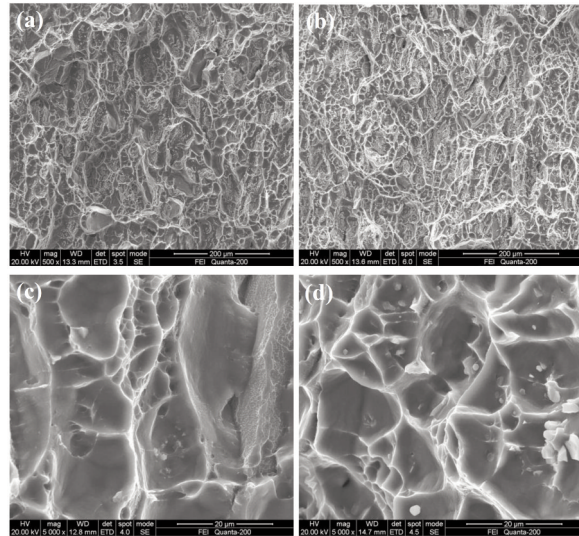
Fracture surfaces of the failed fracture toughness test specimens under double aging (a), (c) Al–Zn–Mg–Cu–Ti; (b), (d) Al–Zn–Mg–Cu–Ti–Sn.
